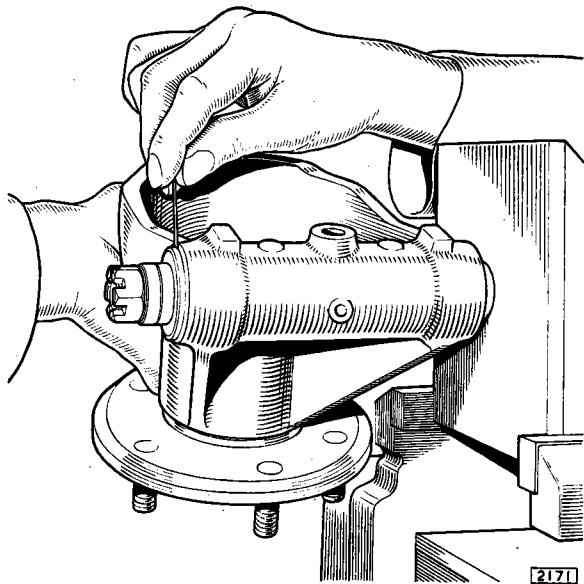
Measuring the amount of clearance between the hub carrier and large washer to determine the end-float of the bearings
